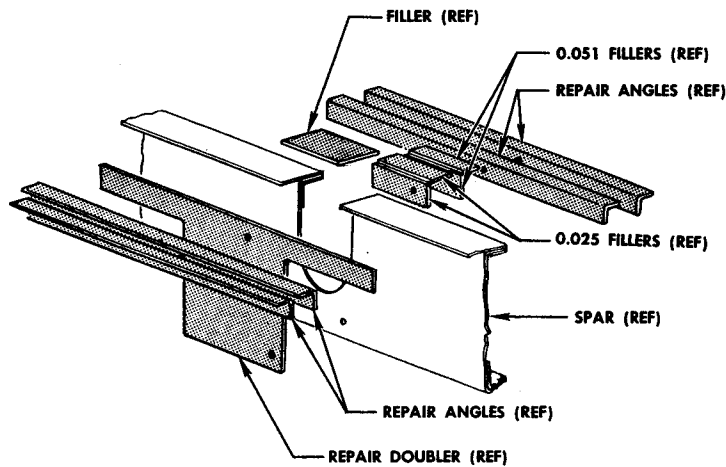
Wing Flap Front Spar (Sheet 1 of 2)
